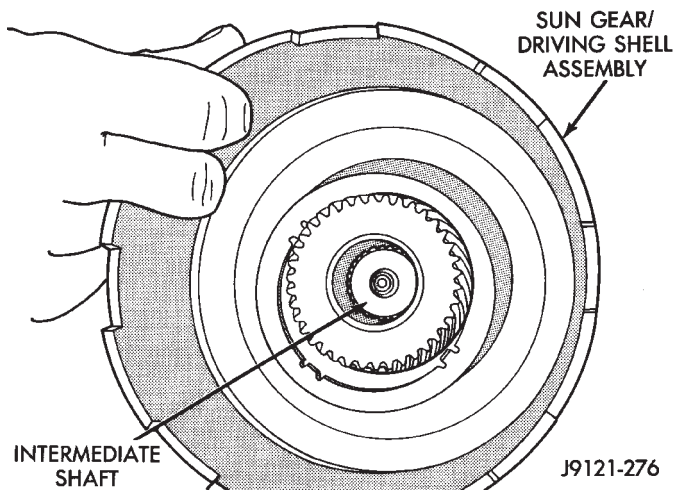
Supporting Sun Gear On Wood Block (42RH)
